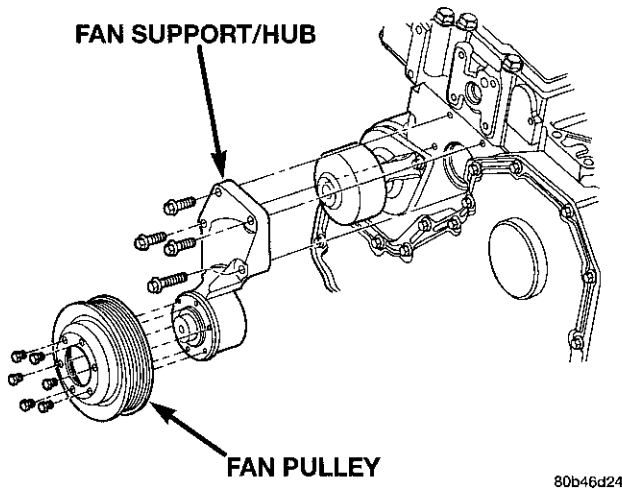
Fan Support Hub Assembly—Removal/Installation
